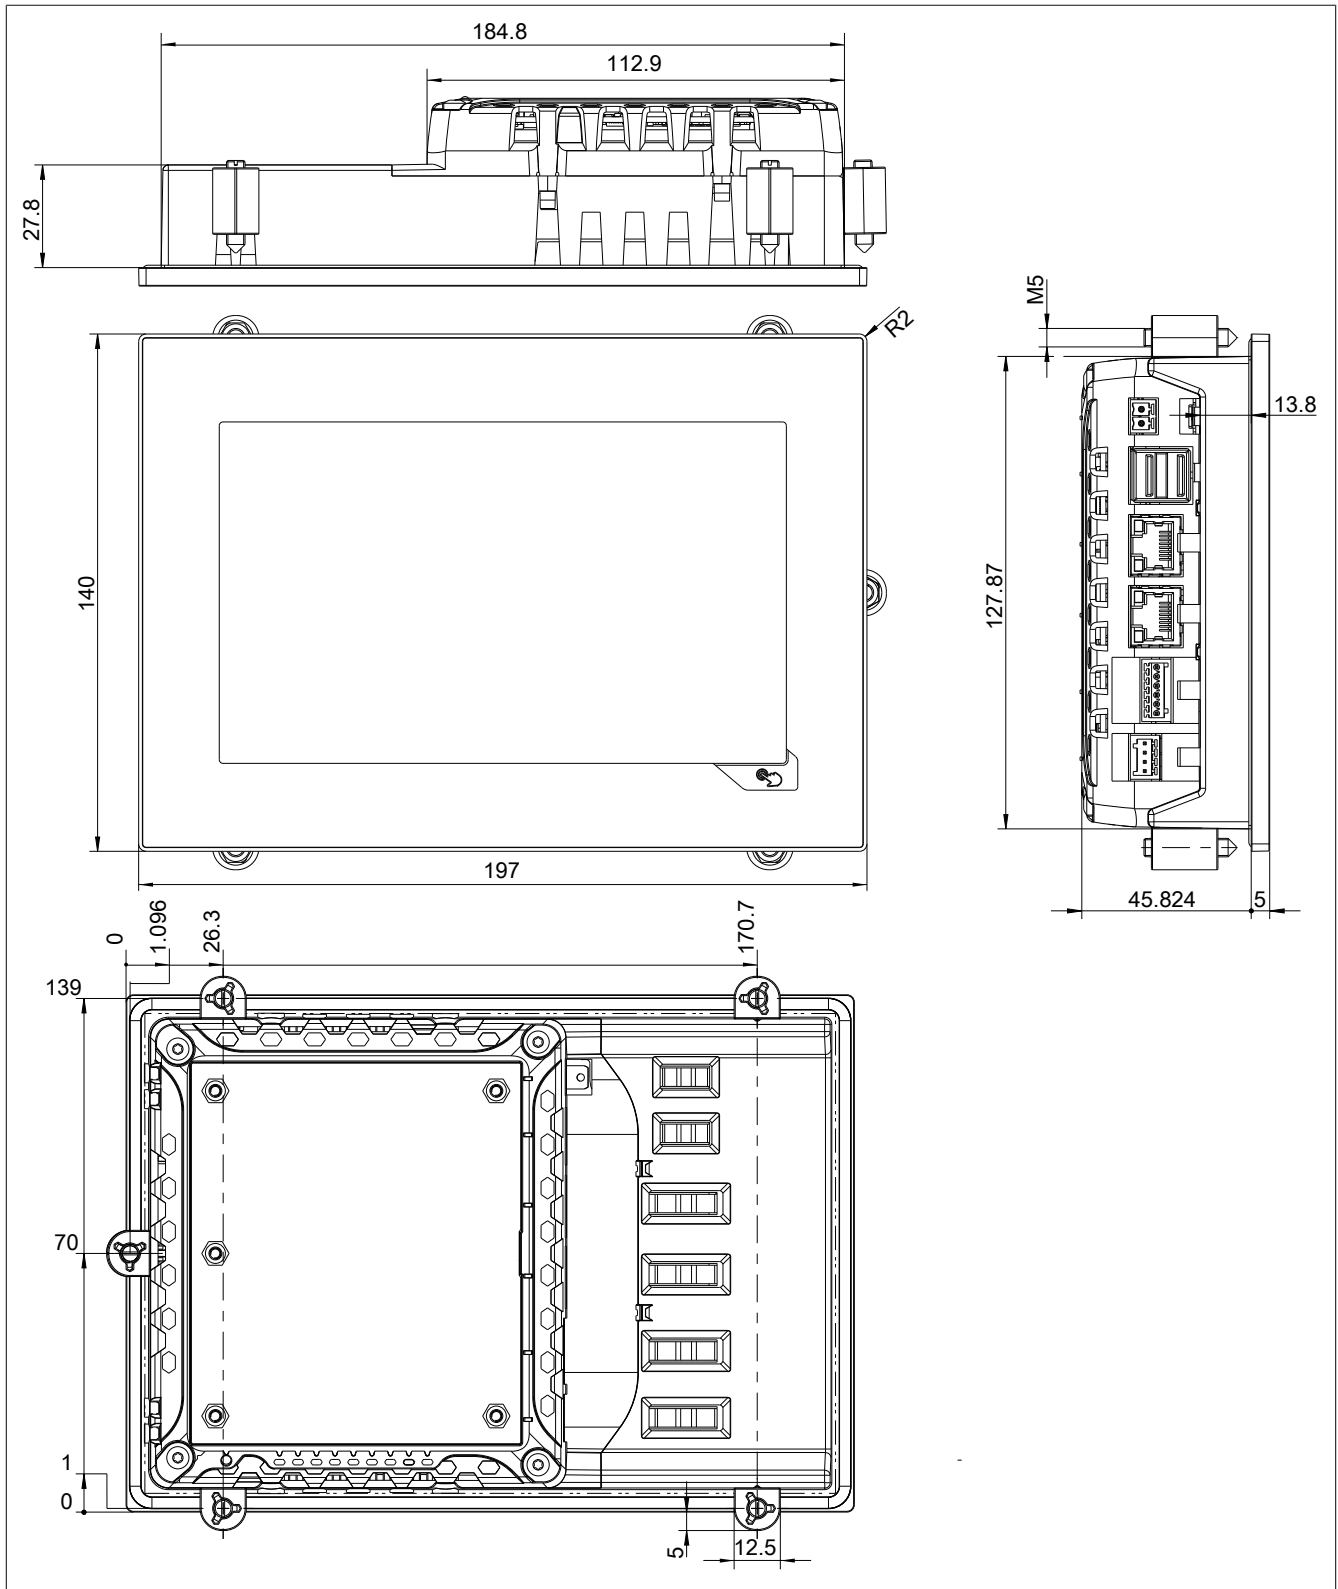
Dimensions - 4PPC70.070x-2xx - 4PPC70.0702
